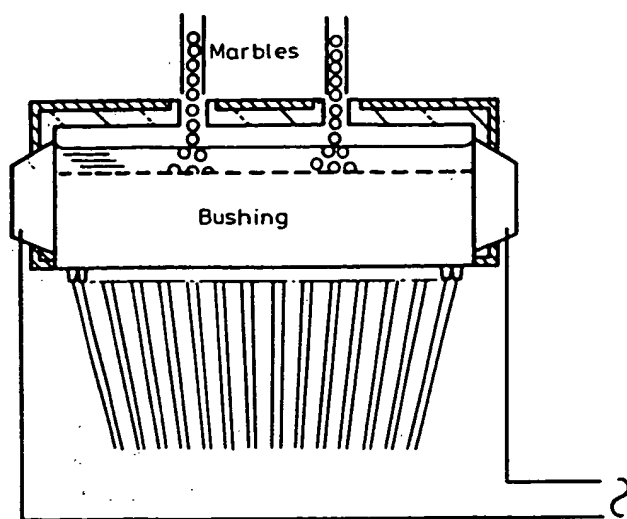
Schematic of a remelt bushing. The broken line within the bushing is a heated perforated plate which retains the unmelted marbles.
